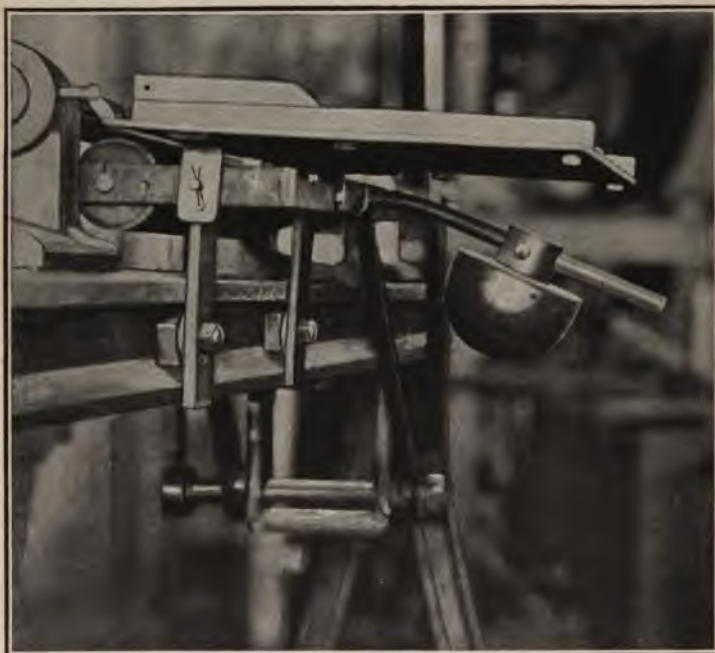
Case-rolling machine showing counterweighted pressure shoe.
